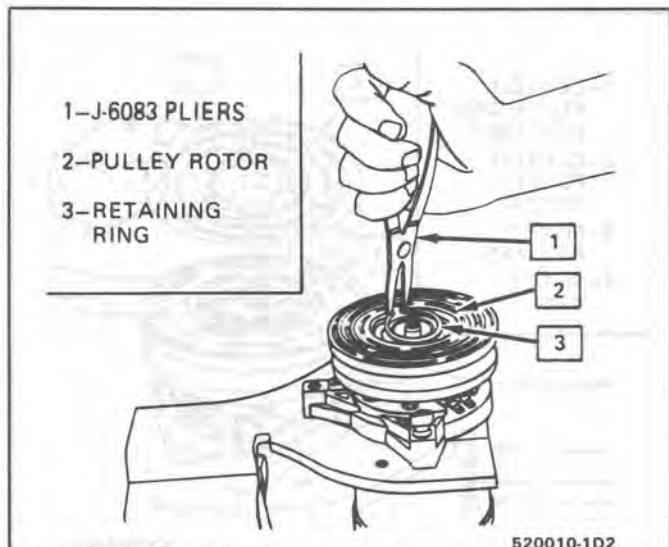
Removing Pulley Rotor & Bearing Assembly Retaining Ring
